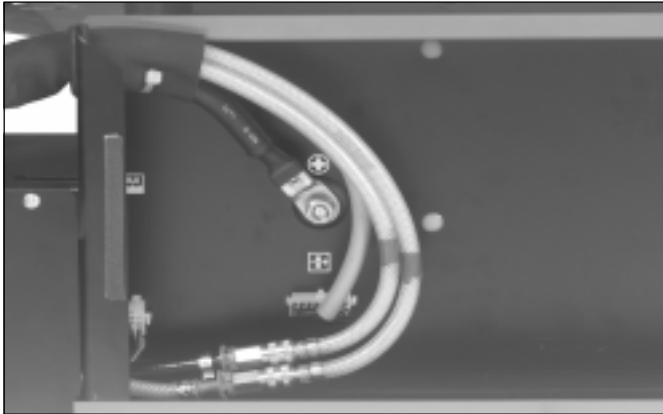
Mounting the interconnecting cable - Dinse or EC type
